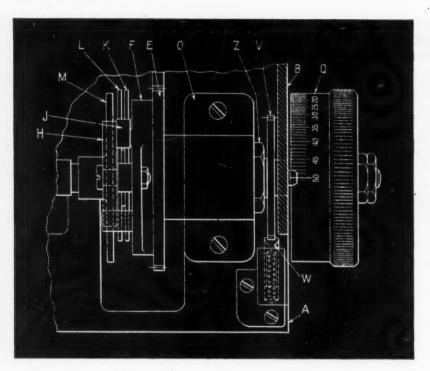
Partial Plan View of Feeding Mechanism, Illustrating how the Setting on Index-wheel Q is Held by the Detent of Spring Plunger W Entering between the Teeth of Gear V
